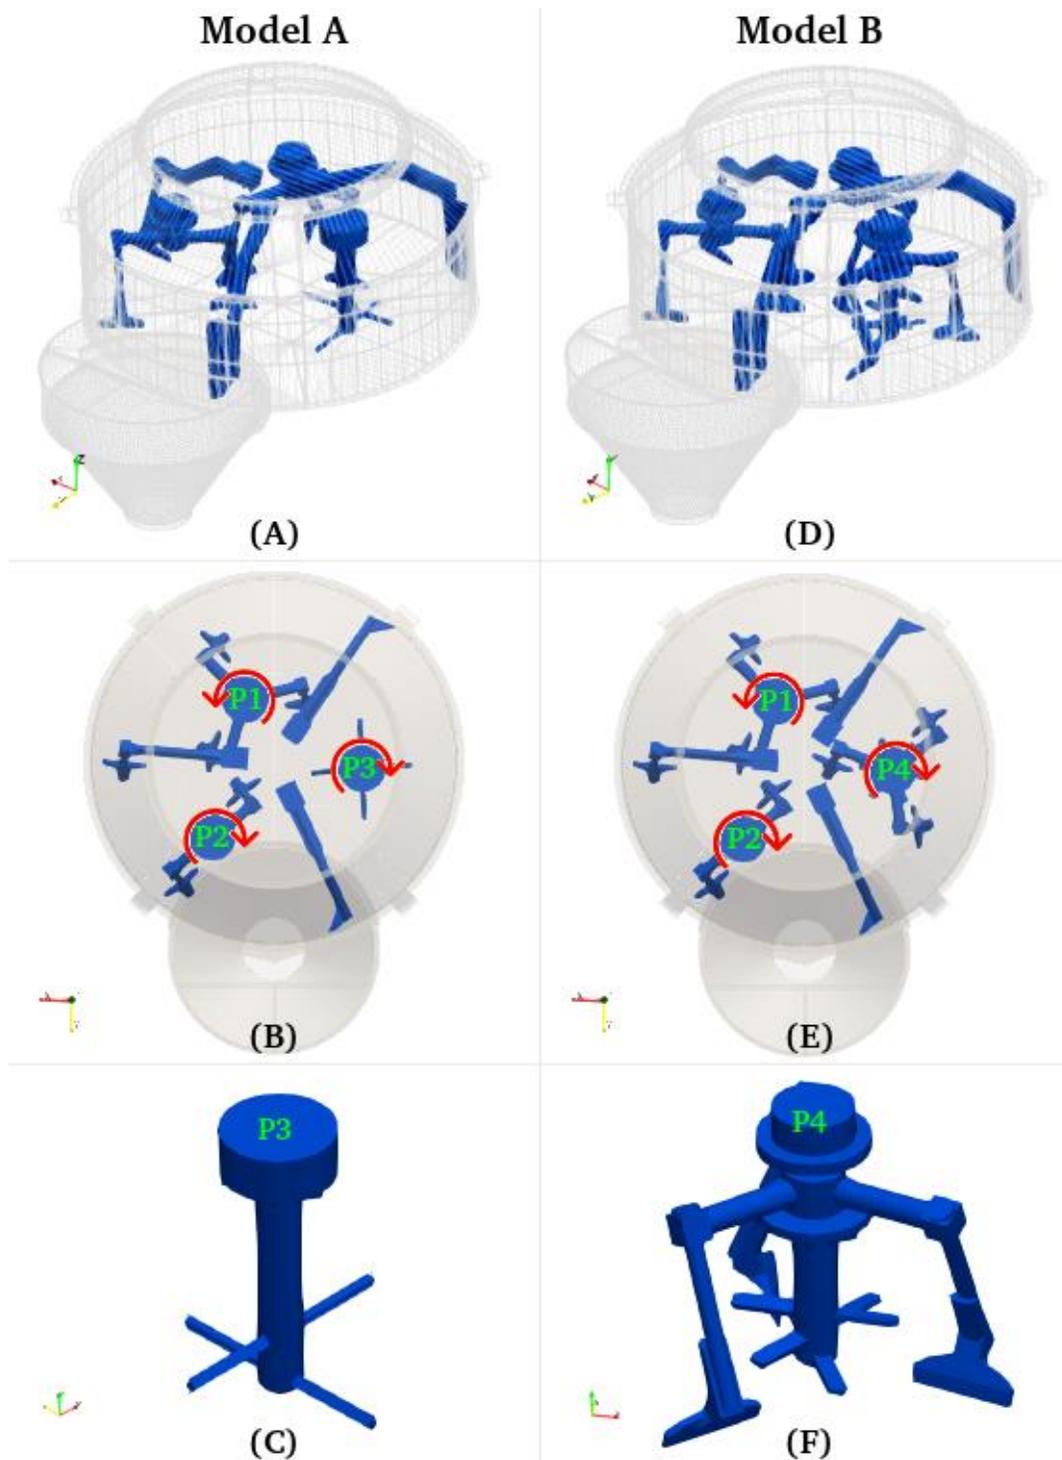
Geometric views of two planetary concrete mixers from top to bottom for each type with their distinct mixing units.
